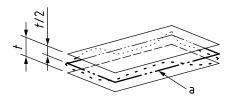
Examples of geometrical tolerancing (Cont.)
